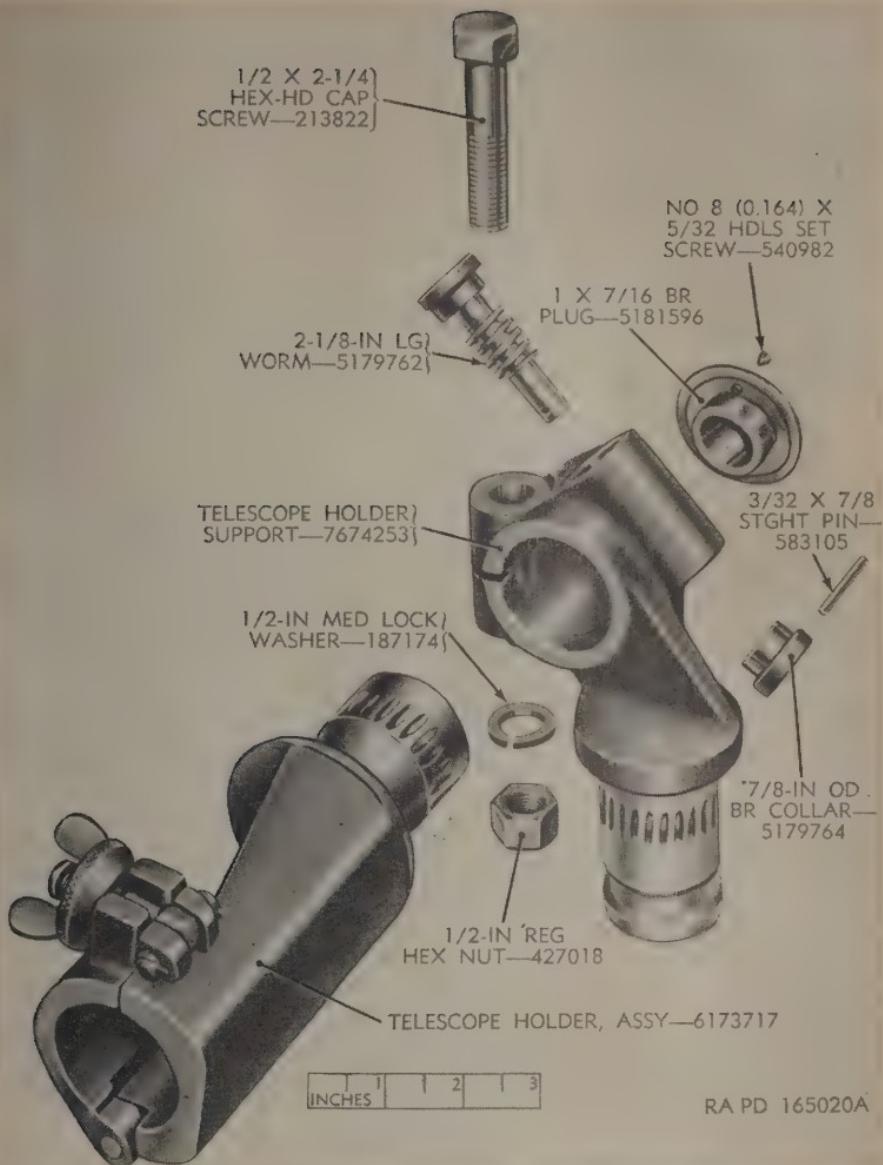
Telescope mount M32—telescope holder support assembly—exploded view.
